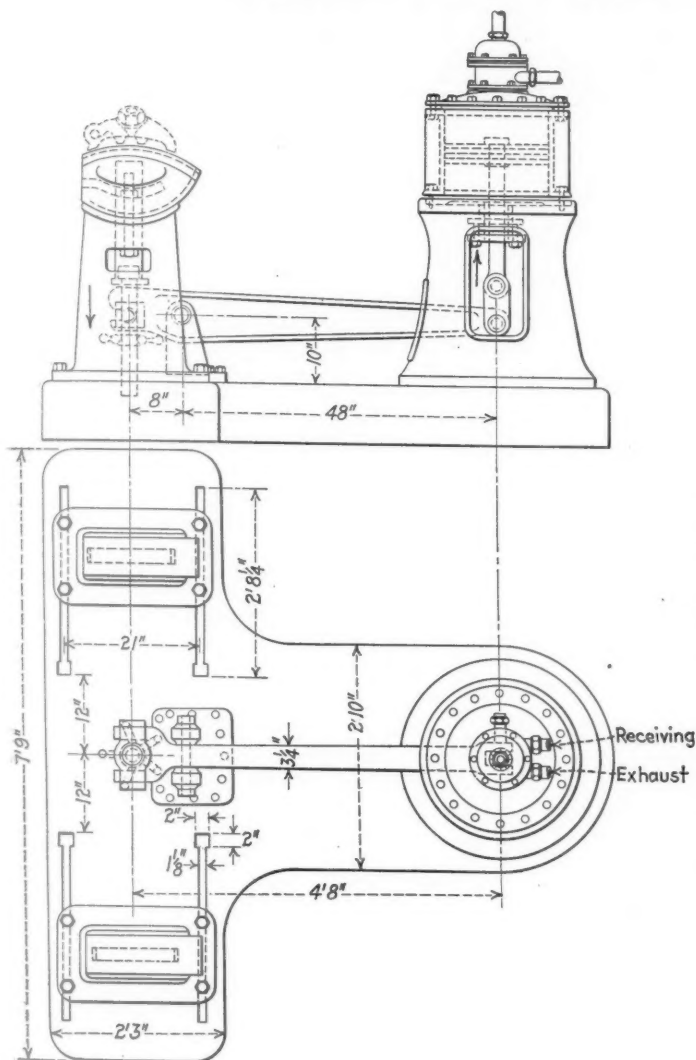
Brake Beam Testing Machine, 75,000 lb. Capacity
